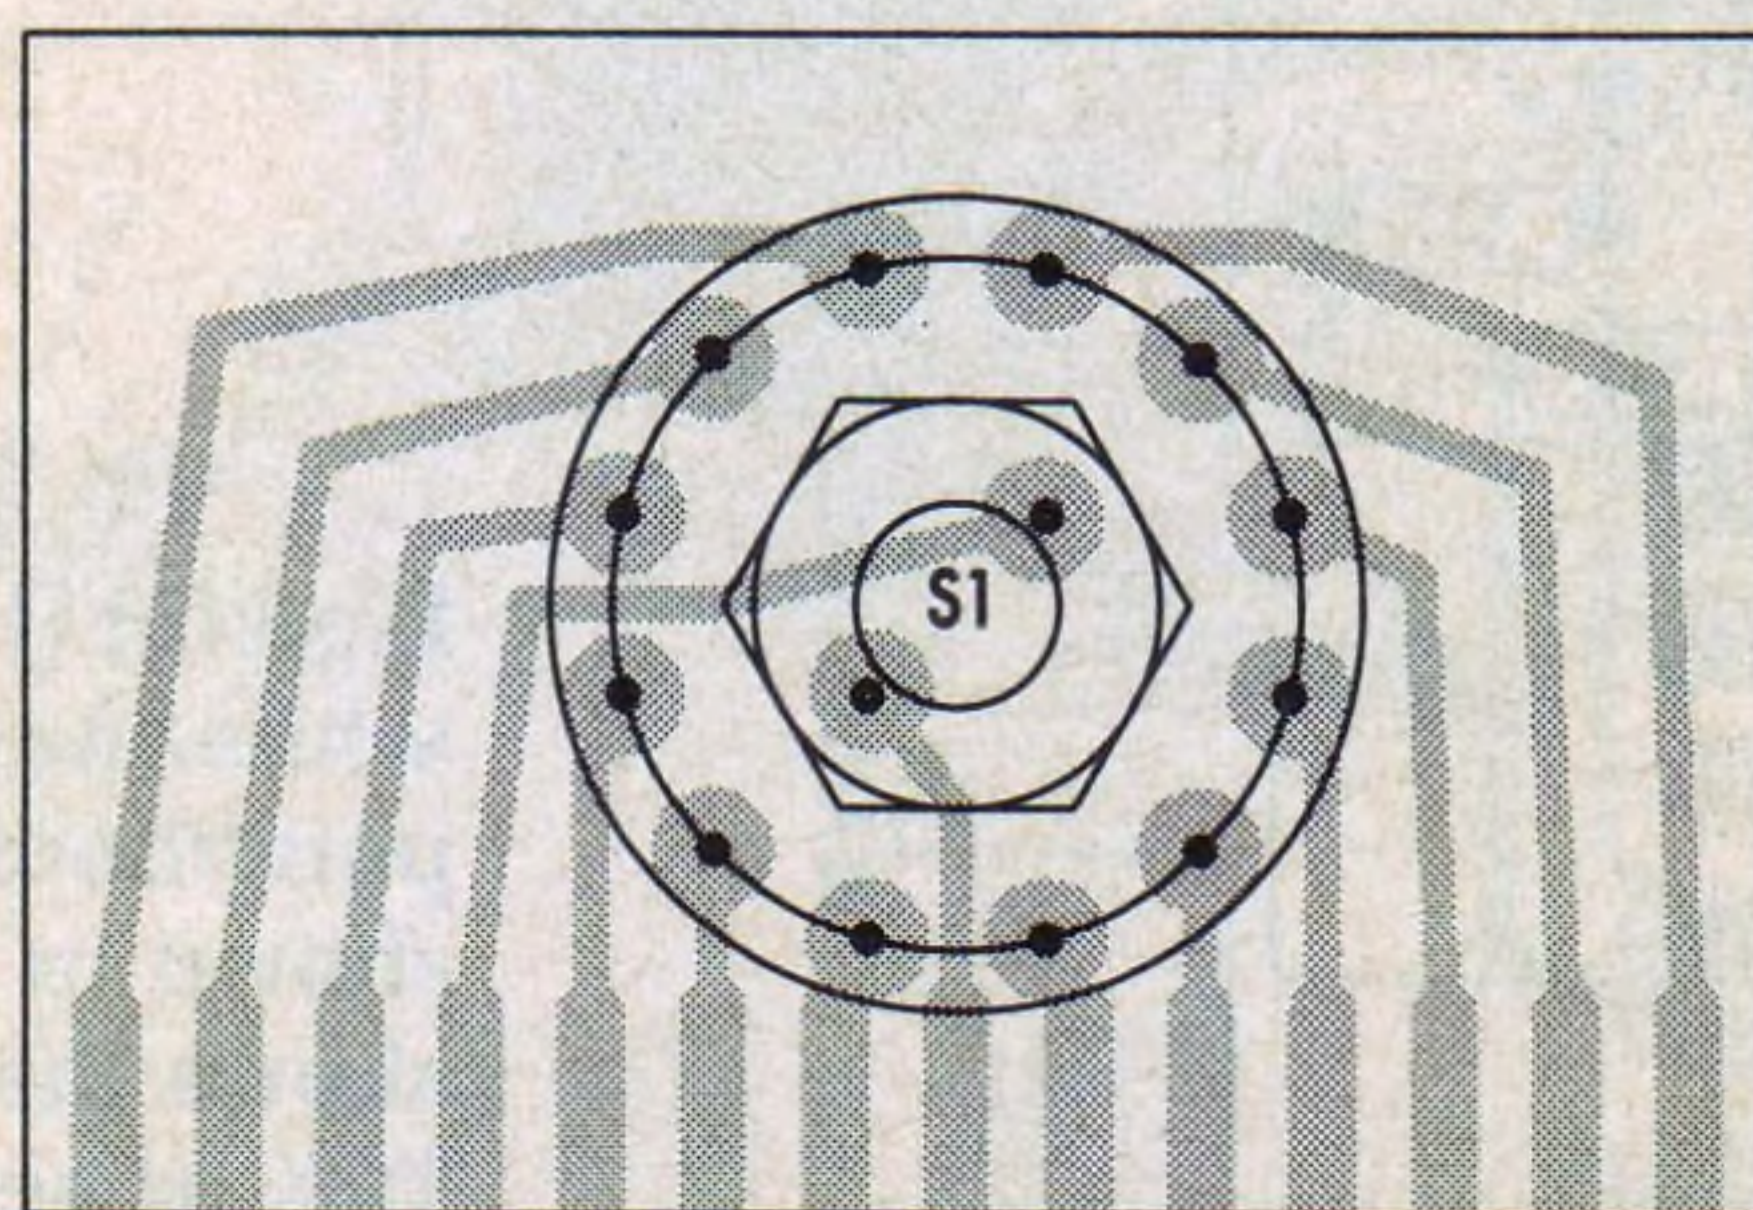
(a): the selector switch board. This mates up to the 14 pins on the input selector board & is soldered at right angles to it.
